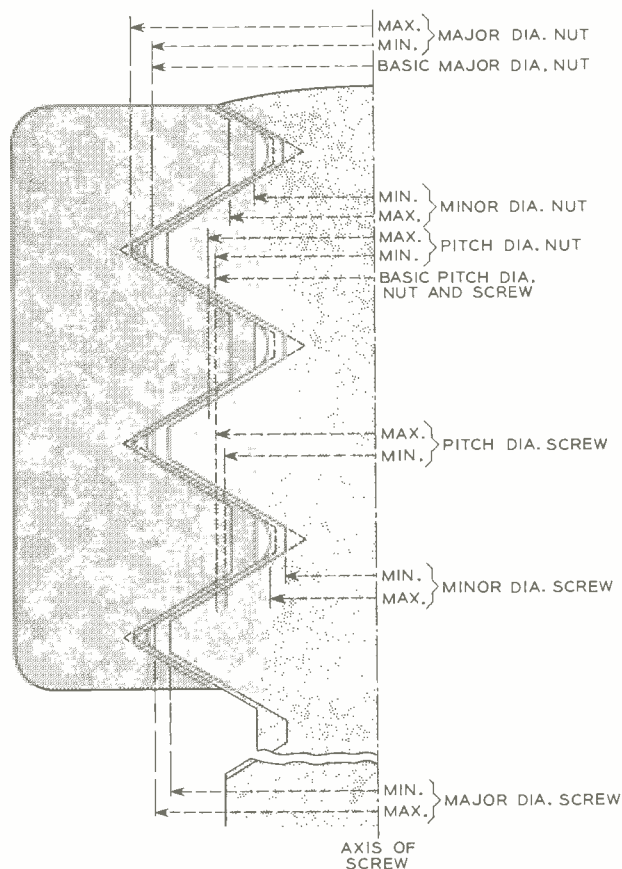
Class 2 screw and Class 2 nut dimensions with tolerances.
